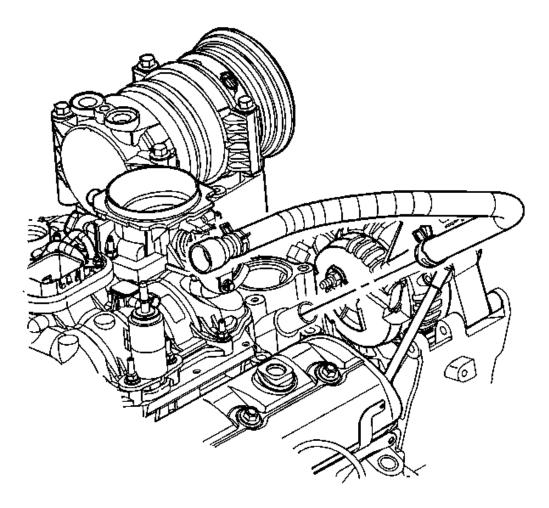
View Of Heater Inlet Hose & Clamp Courtesy of GENERAL MOTORS CORP.
